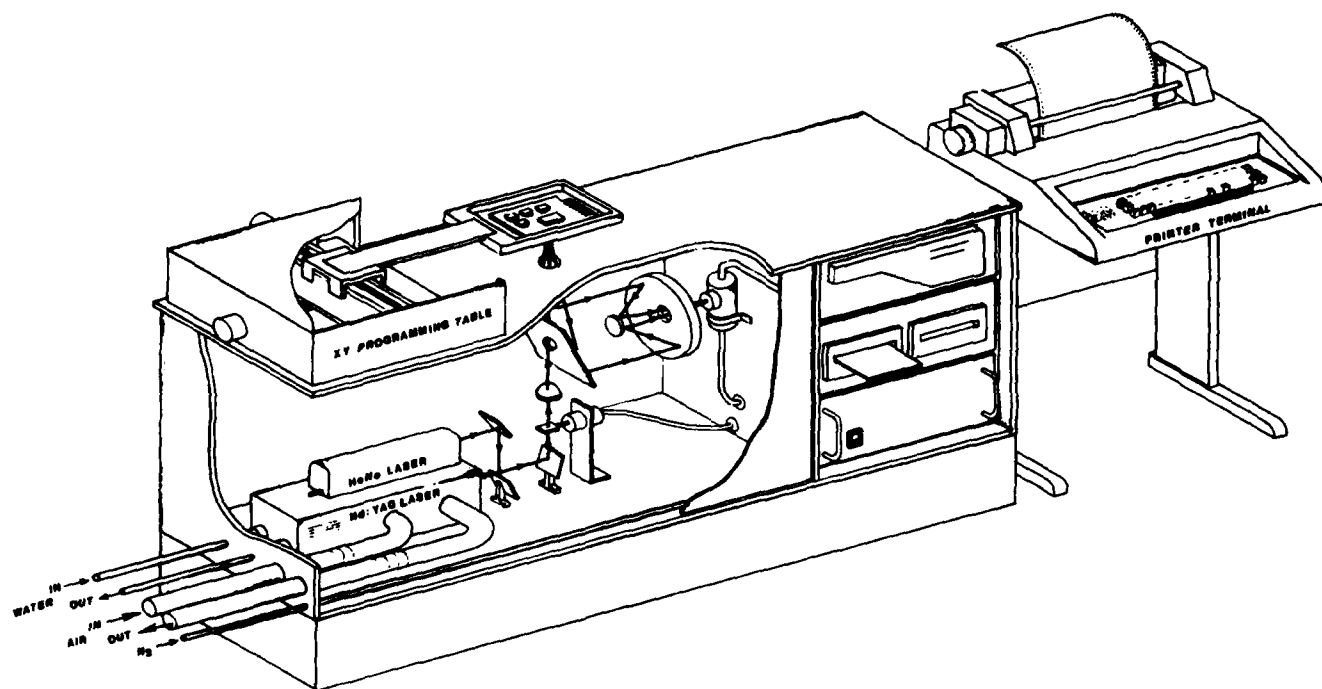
Artist's Concept: Solder Joint Inspection System for Feed-Through Joints
